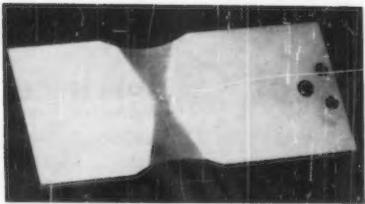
(a) Specimen as machined. The surface formed by the milling cutter was prepared in order to make it photograph dark, and is not similar to the surface of the specimens tested.
